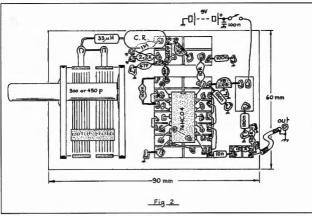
The 74HC04 chip is fitted into a 14-pin DIL IC socket, which in turn is soldered- using tinned copper wires of about 0.6 mm, upon a segmented substrate measuring 25 x 30 mm. However any preferred wiring methodincluding 'ugly' style should work satisfactorily, provided that component leads are made reasonably short
